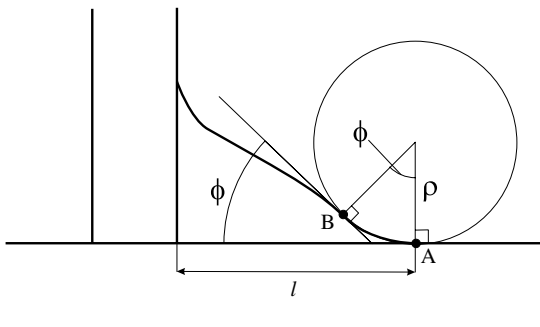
Weld geometry definition, weld toe radius, ρ ; weld toe angle, ϕ ; and weld leg length, l .
